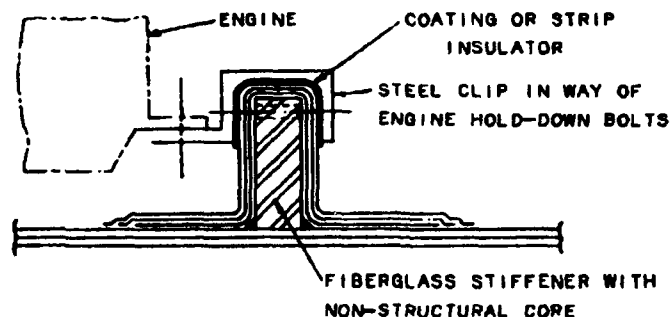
Engine Bearer - Steel Clip Bolted to Hat Stiffener [Gibbs and Cox, *Marine Design Manual for FRP*]
